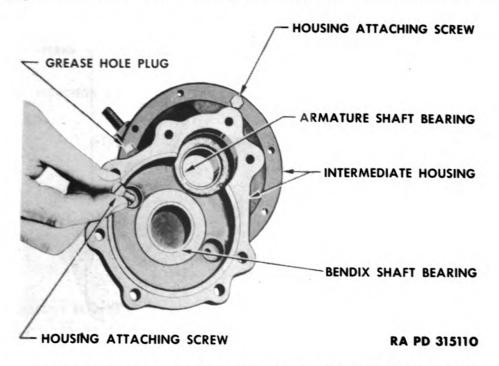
Intermediate Housing for MBD 4007, A, B and MBD 4010, A Cranking Motors
